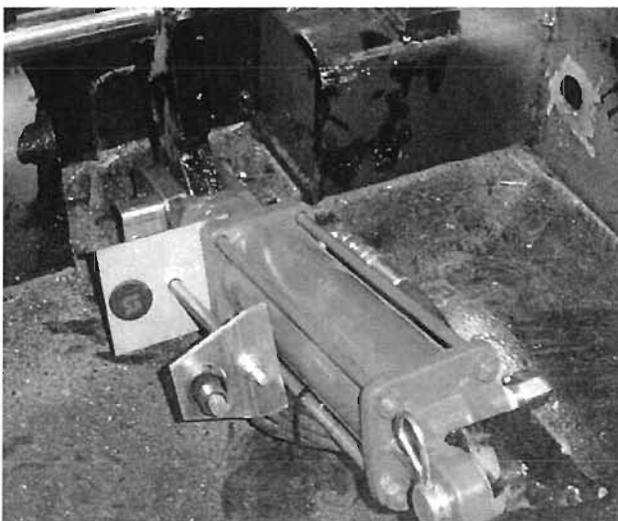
Hydraulic cylinder installed for hoses to enter from the right, limit switch on left.
